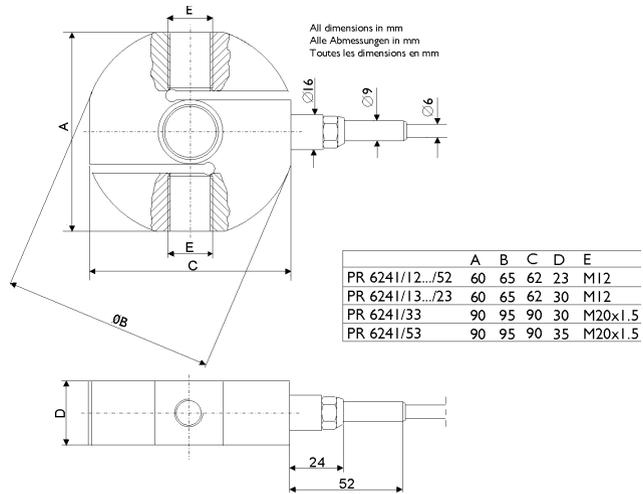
Dimensions PR 6241/12...53 (version 1)
